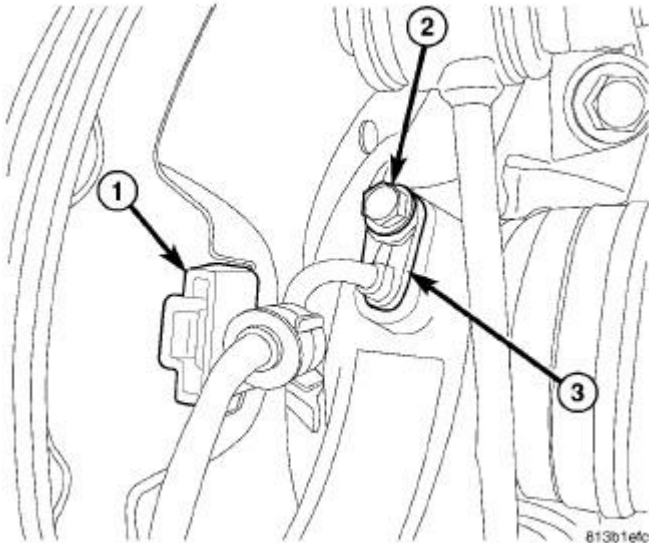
WHEEL SPEED SENSOR AT REAR KNUCKLE
